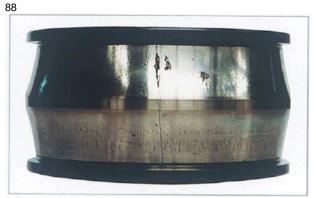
Crack from Large Fitting Stress Due to Temperature Difference between Shaft and Inner Ring²
